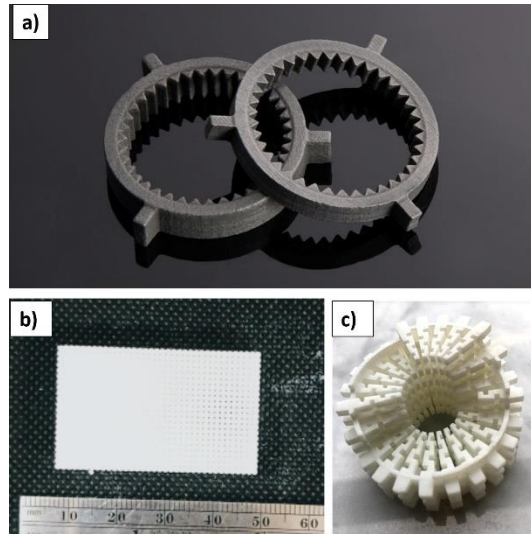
Samples printed using Nano-Particle Jetting (NPJ) technology. (a) Stainless Steel gears printed on XJet [20]. (b) Lattice part printed for antennae applications. (c) Refractory parts fabricated for aerospace applications.
